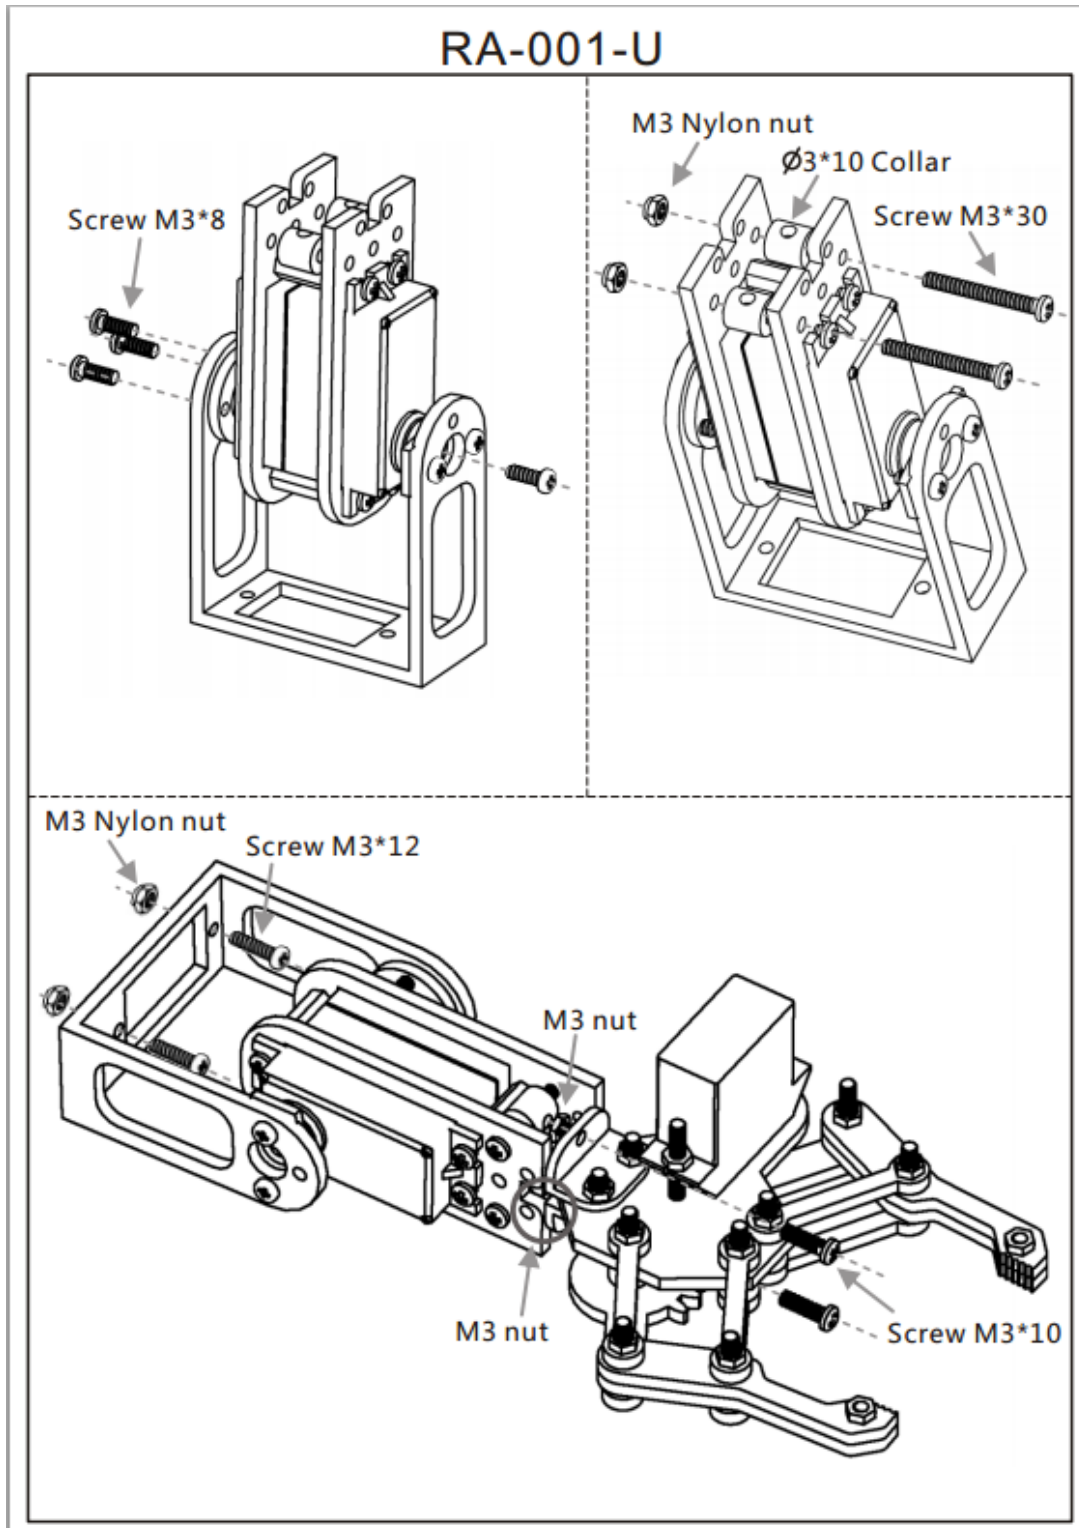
depicted above is a simple engineering drawing of the model MKII robotic claw that we are using within our ROV design.
